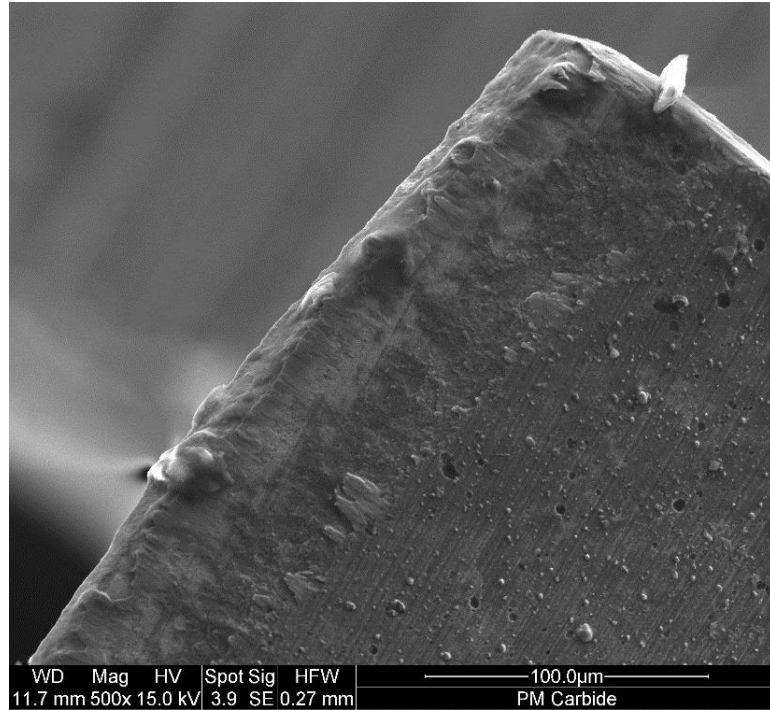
500x SEM top down view of the cutting edge of the carbide drill bit after drilling 60 holes in PM titanium.
